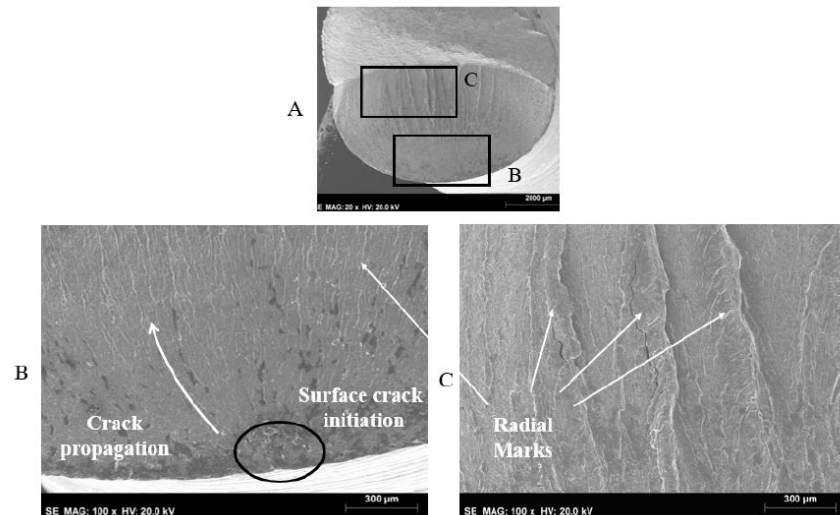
Fatigue fracture surface of a multiaxial specimen with a 0.51 shear/axial stress ratio.
